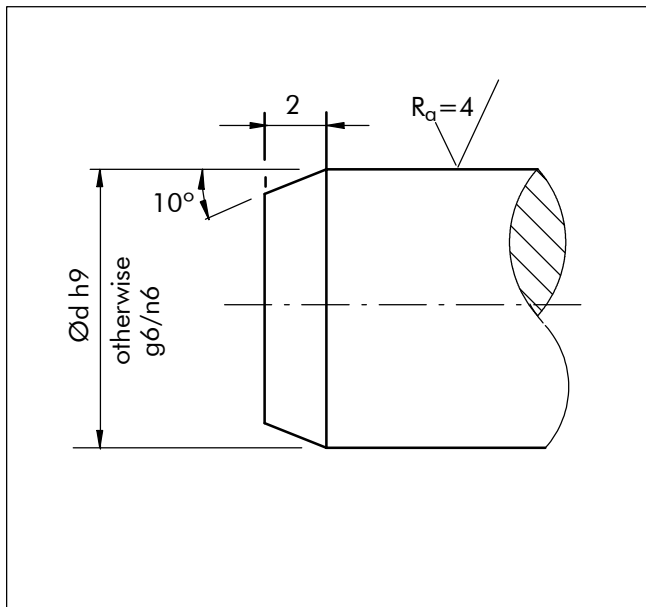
Tolerance of the shaft, surface roughness and chamfer of the shaft
